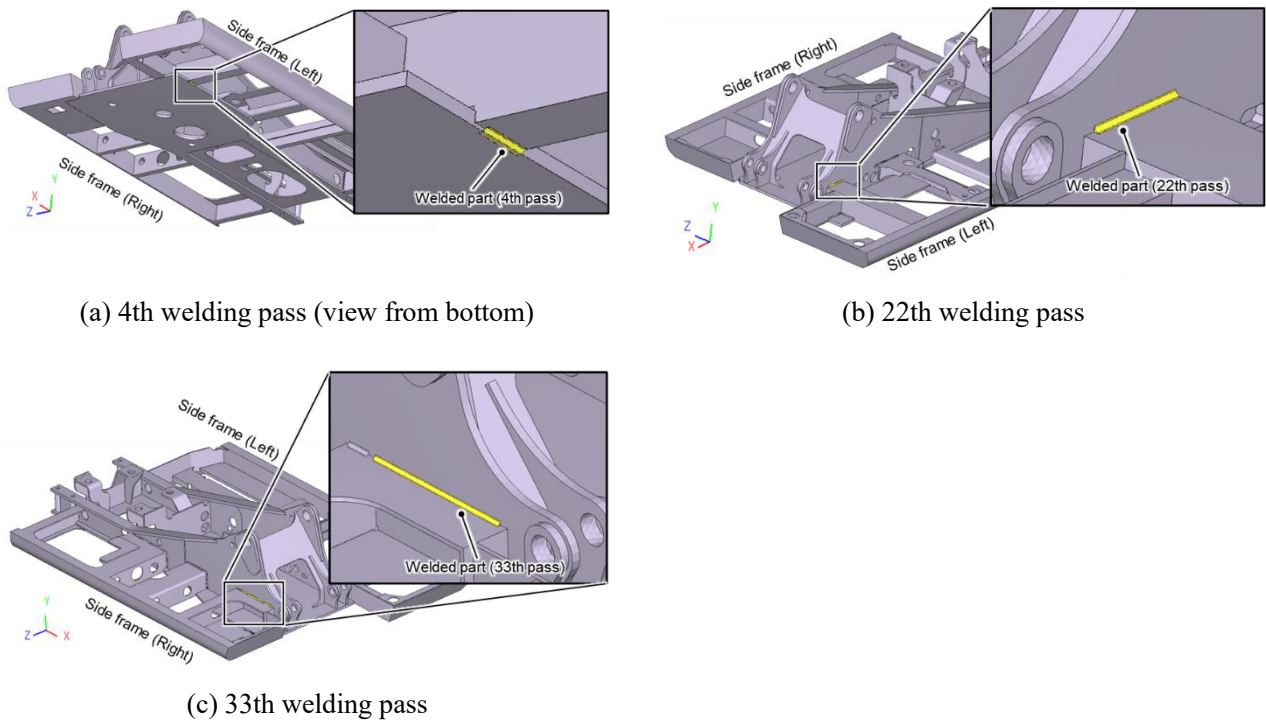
Welding positions and lines in 4<sup>th</sup>, 22<sup>th</sup>, and 33<sup>th</sup> welding pass.
